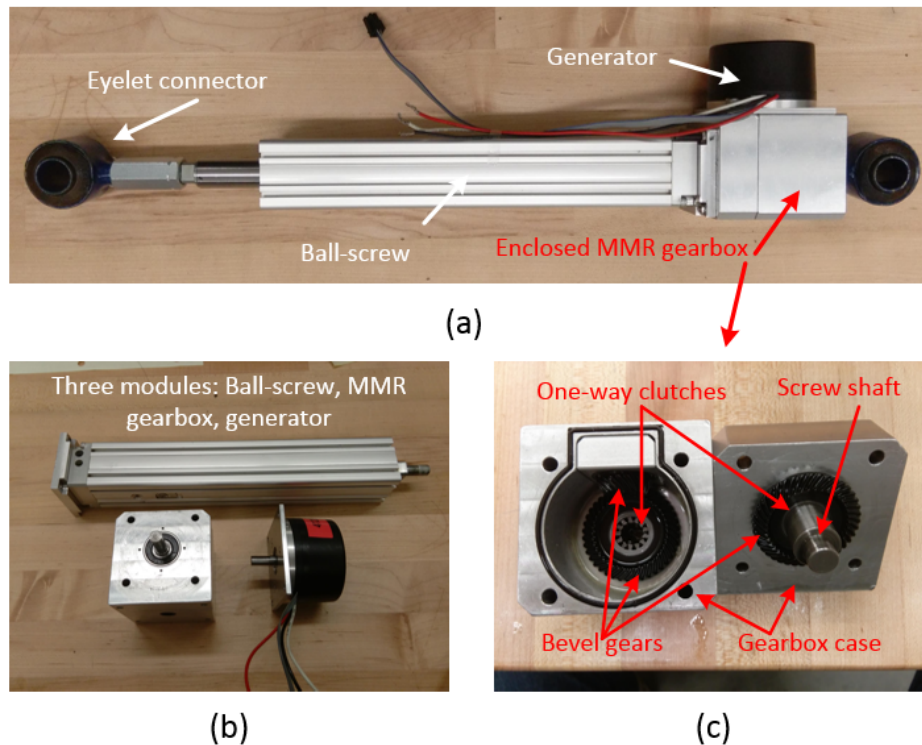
the Prototype of ball-screw-based MMR shock absorber (a) the overall shock absorber (b) three independent modules (c) inside structure of MMR gearbox
